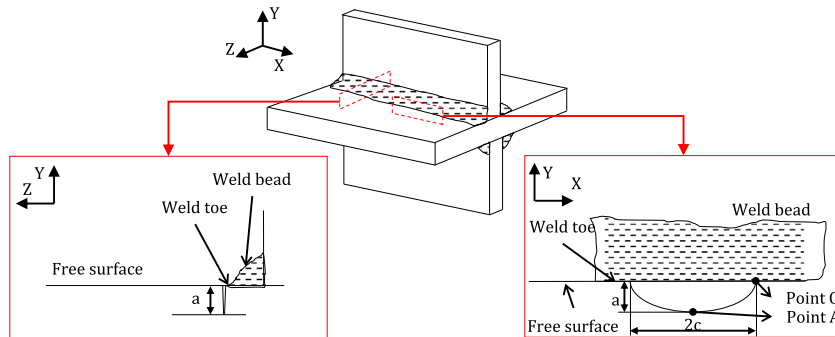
Crack developing at the weld toe of a non-load-carrying cruciform joint. Strategy involving one parameter, the crack depth, a , to model the crack front, or two parameters, the crack depth, a and the semi-width, c .
